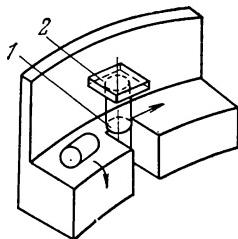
Orienting cylindrical parts of a length almost equal to the diameter:
